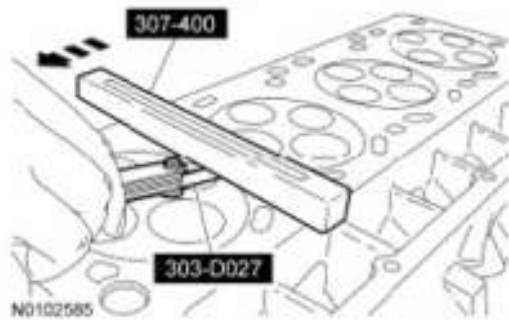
Pulling Feeler Gauge Out From Under Gauge Bar
